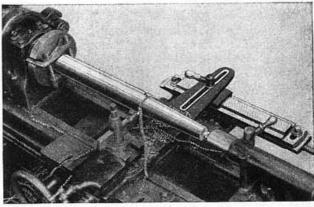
A 16-inch Lathe Equipped with Taper Attachment for Manufacturing Tapered Shafts
